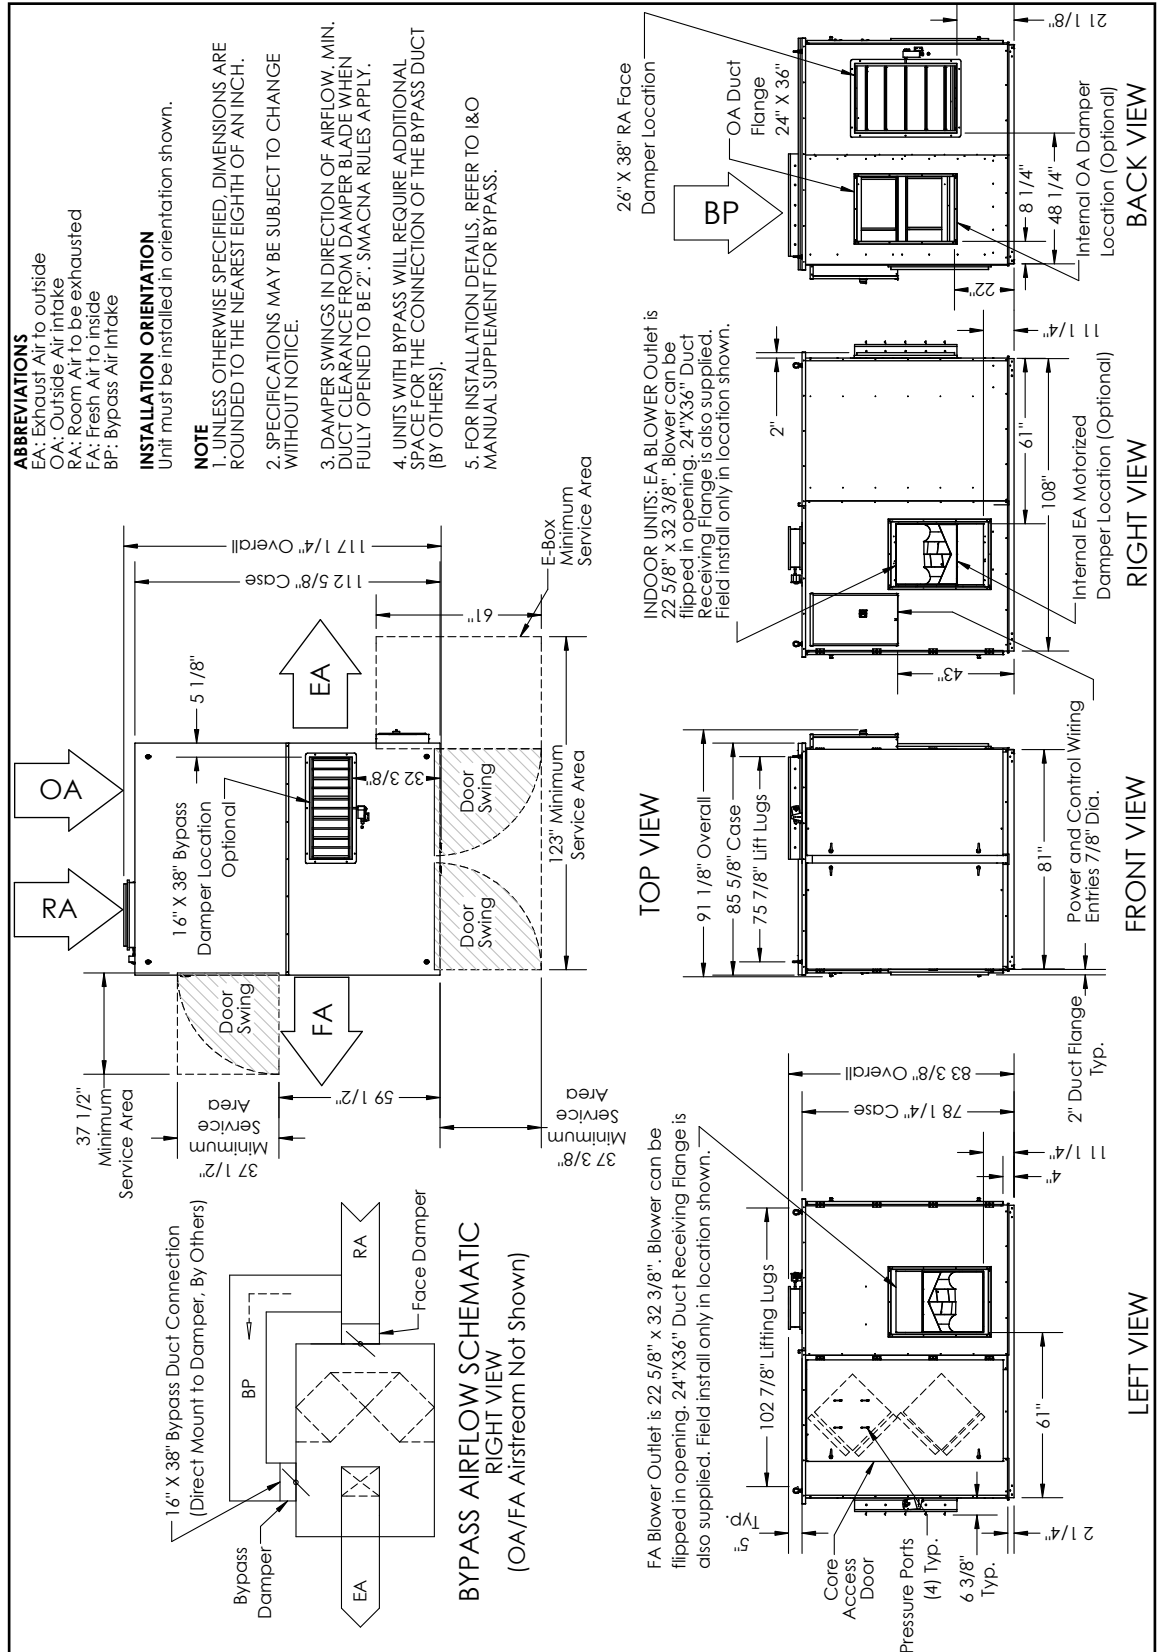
HE6XIN, HE7XIN, & HE8XIN DIMENSION DRAWING
